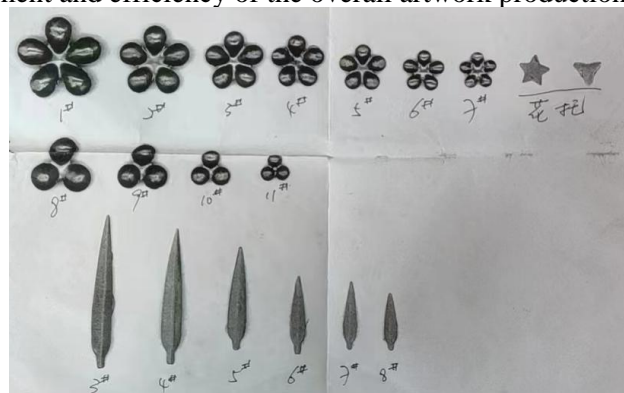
Machine tool mold pressing plum blossom and bamboo leaves in Chinese iron painting.
